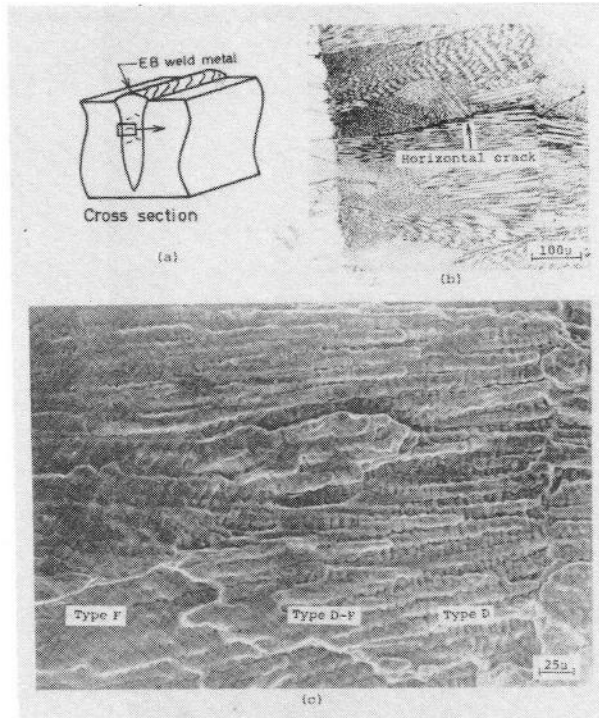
Horizontal cracks in SUS 310S-(D) weld metal made by electron beam welding;---(a) schematic illustration of cross section, (b) polished and etched section including typical horizontal crack, and (c) fracture surface of horizontal crack in (b) showing features of Type D, Type D-F and Type F of solidification crack surface.
